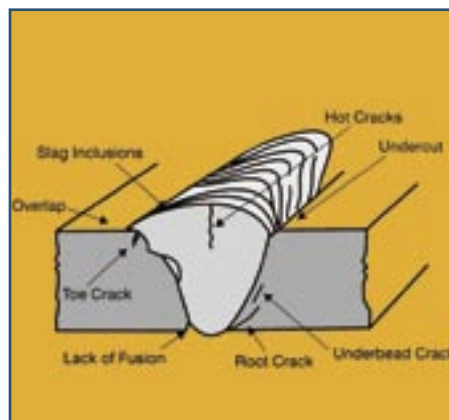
Typical crack defects around a weld (WTIA).
